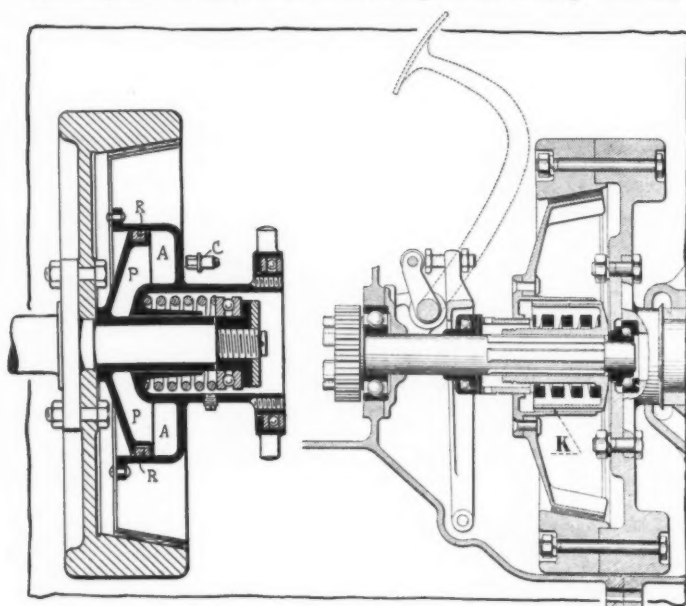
Verges cone clutch with air check and Hispano-Suiza clutch with fluted and sliding brake surfaces K
